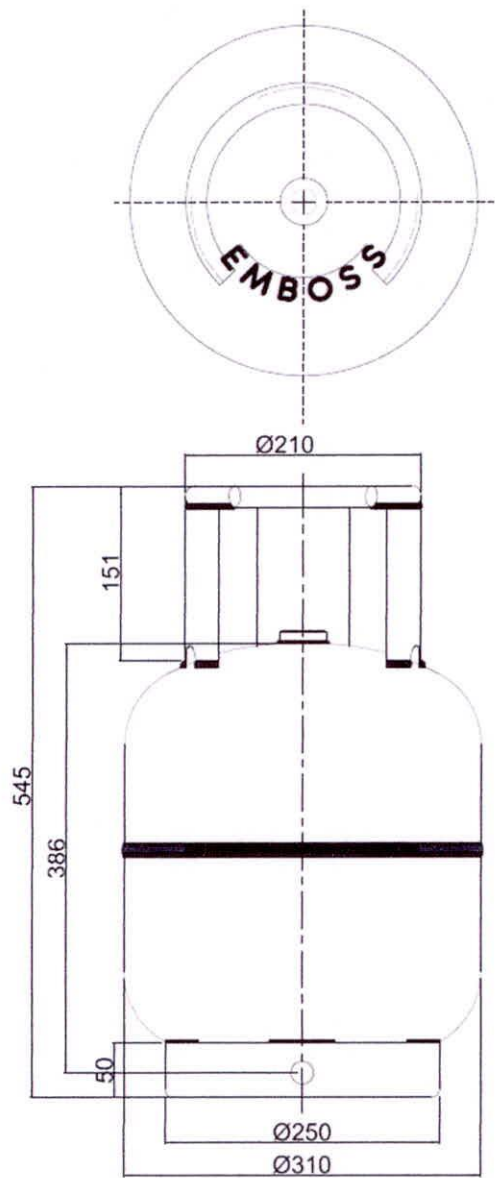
11.0 kg 310 mm diameter assembly details
